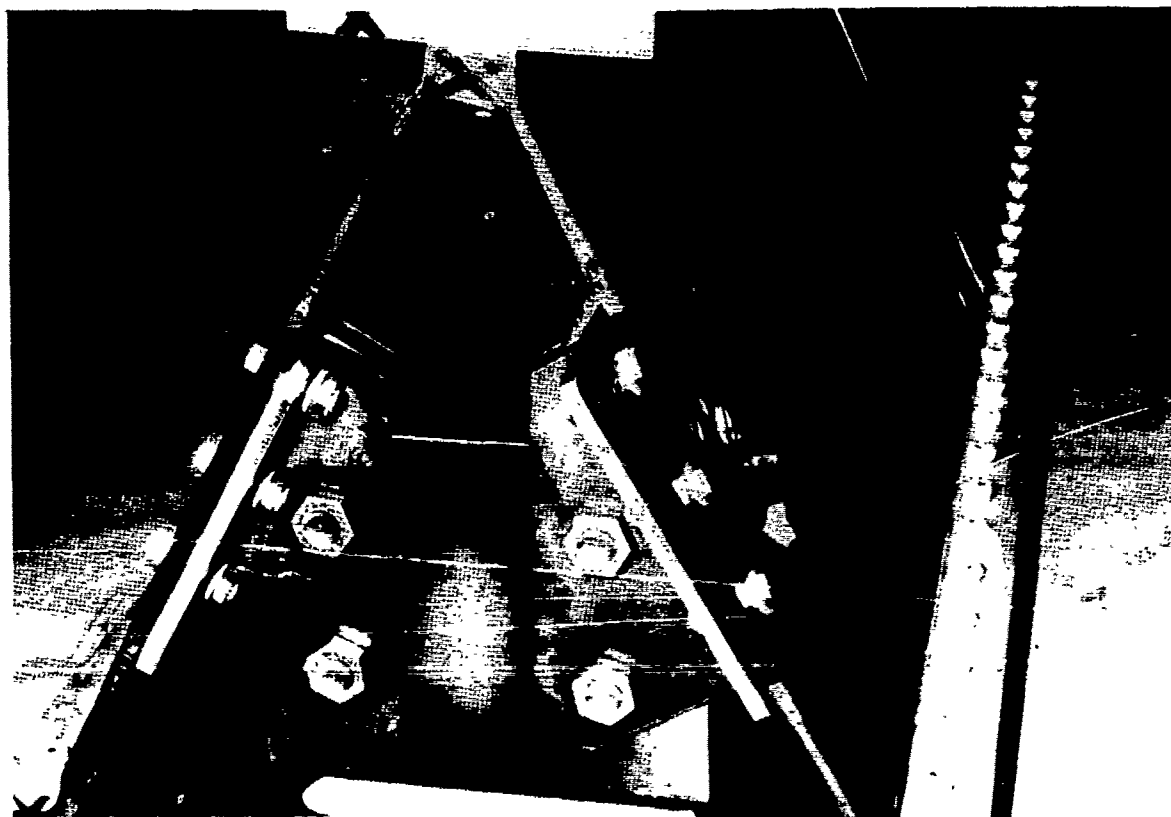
25578687-503 SPECIMEN, SHOWING FAILURES IN END
